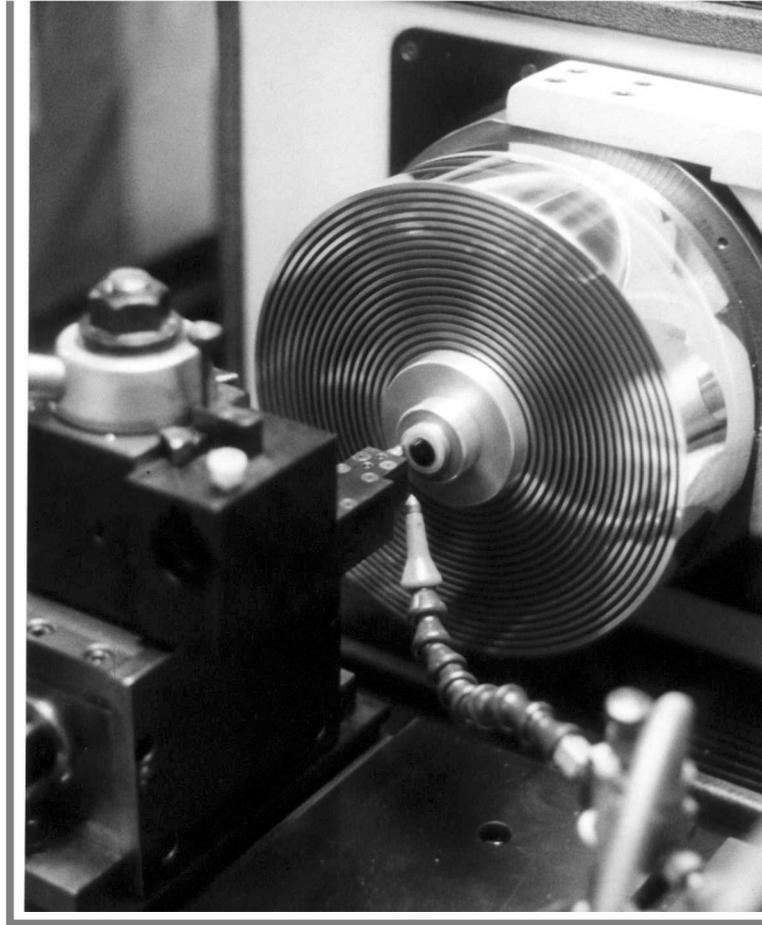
Photograph showing the workpiece fixed in the vacuum chuck.
